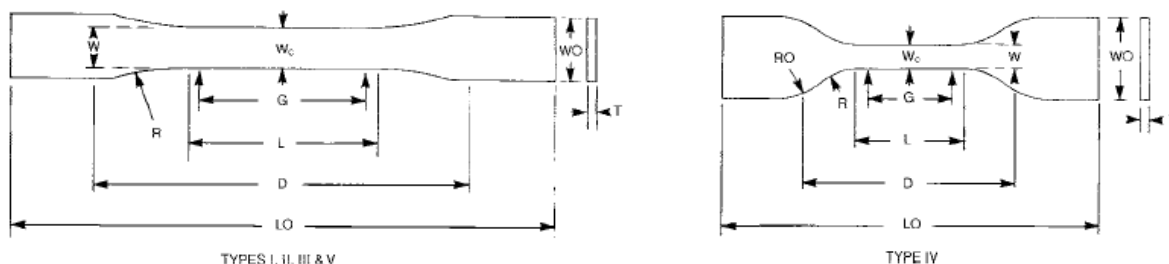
Neat Adhesive Tension Test Specimen (ASTM D-638)
